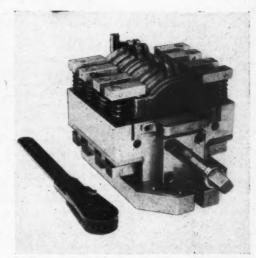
In this special Larrad fixture, four bearing caps are clamped by the downward movement of arms at both sides. The caps are located on a removable plate, to facilitate unloading and loading operations
